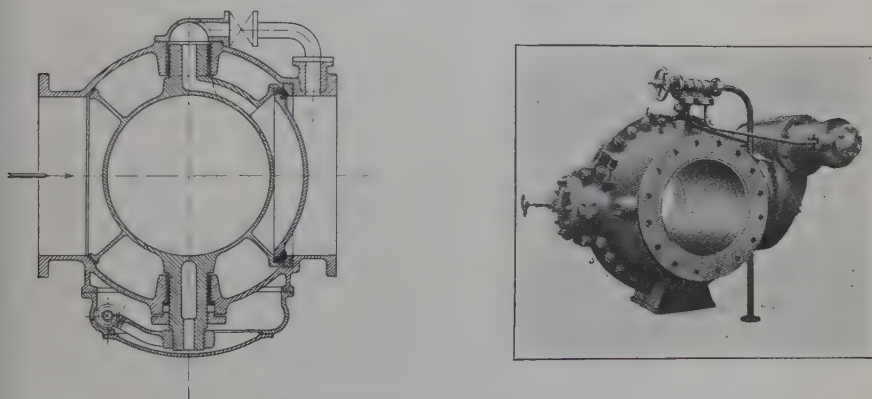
ESCHER WYSS ROTARY PENSTOCK VALVE
